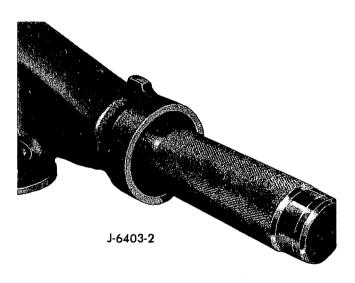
B-24 - Removing Rear Bearing Retainer Bushing
